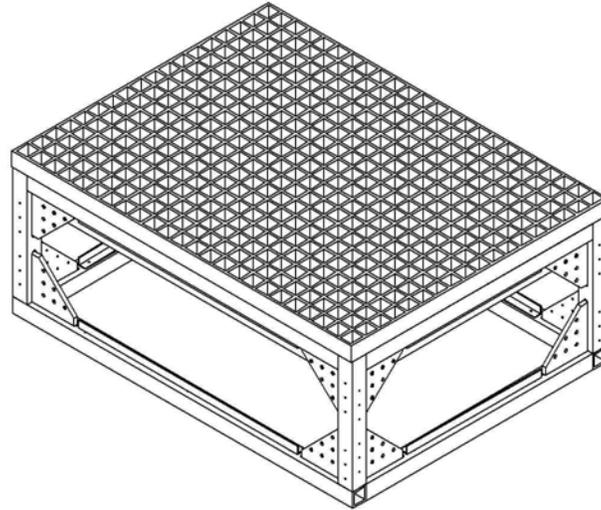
Elevated Test Lane Cube Assembly without Side Panels
